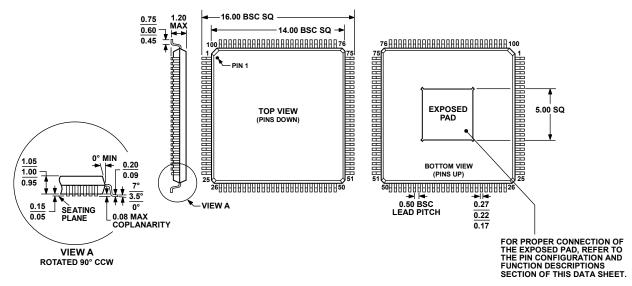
100-Lead Thin Quad Flat Package, Exposed Pad [TQFP_EP] (SV-100-4) Dimensions shown in millimeters
